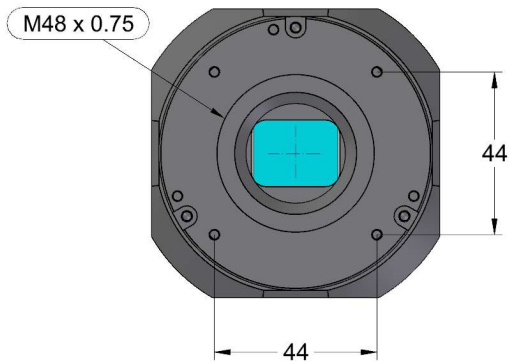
C1+ camera head with C2 compatible adapter front view dimensions
